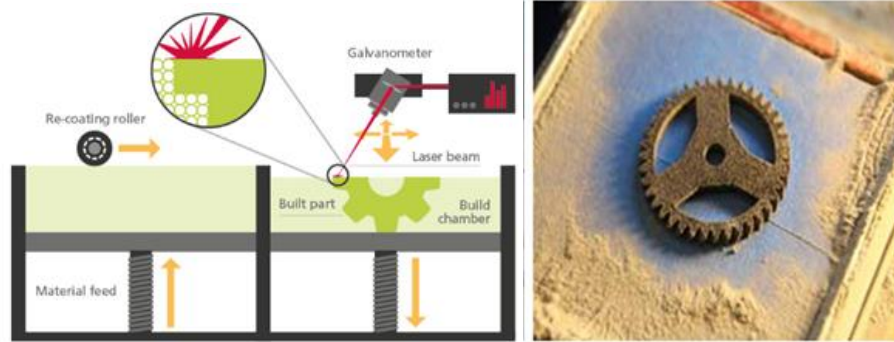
Basic setup of SLS, Parts printed by SLS [16]
